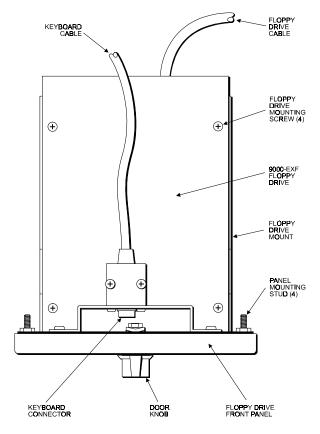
Floppy Drive - Front Mounting Option (top view)
